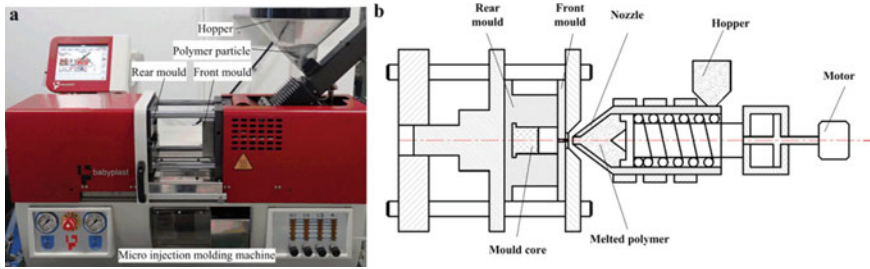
Photograph and working principle of the micro injection molding machine: a photograph; b working principle
